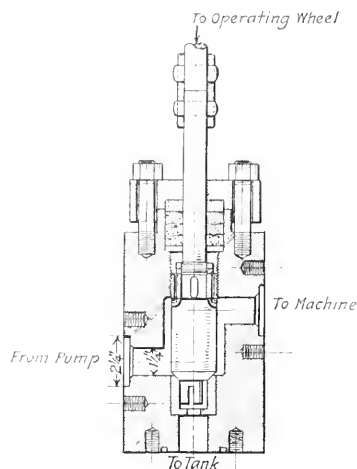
OPERATING VALVE FOR 5000 LB. PER SQ. IN.
